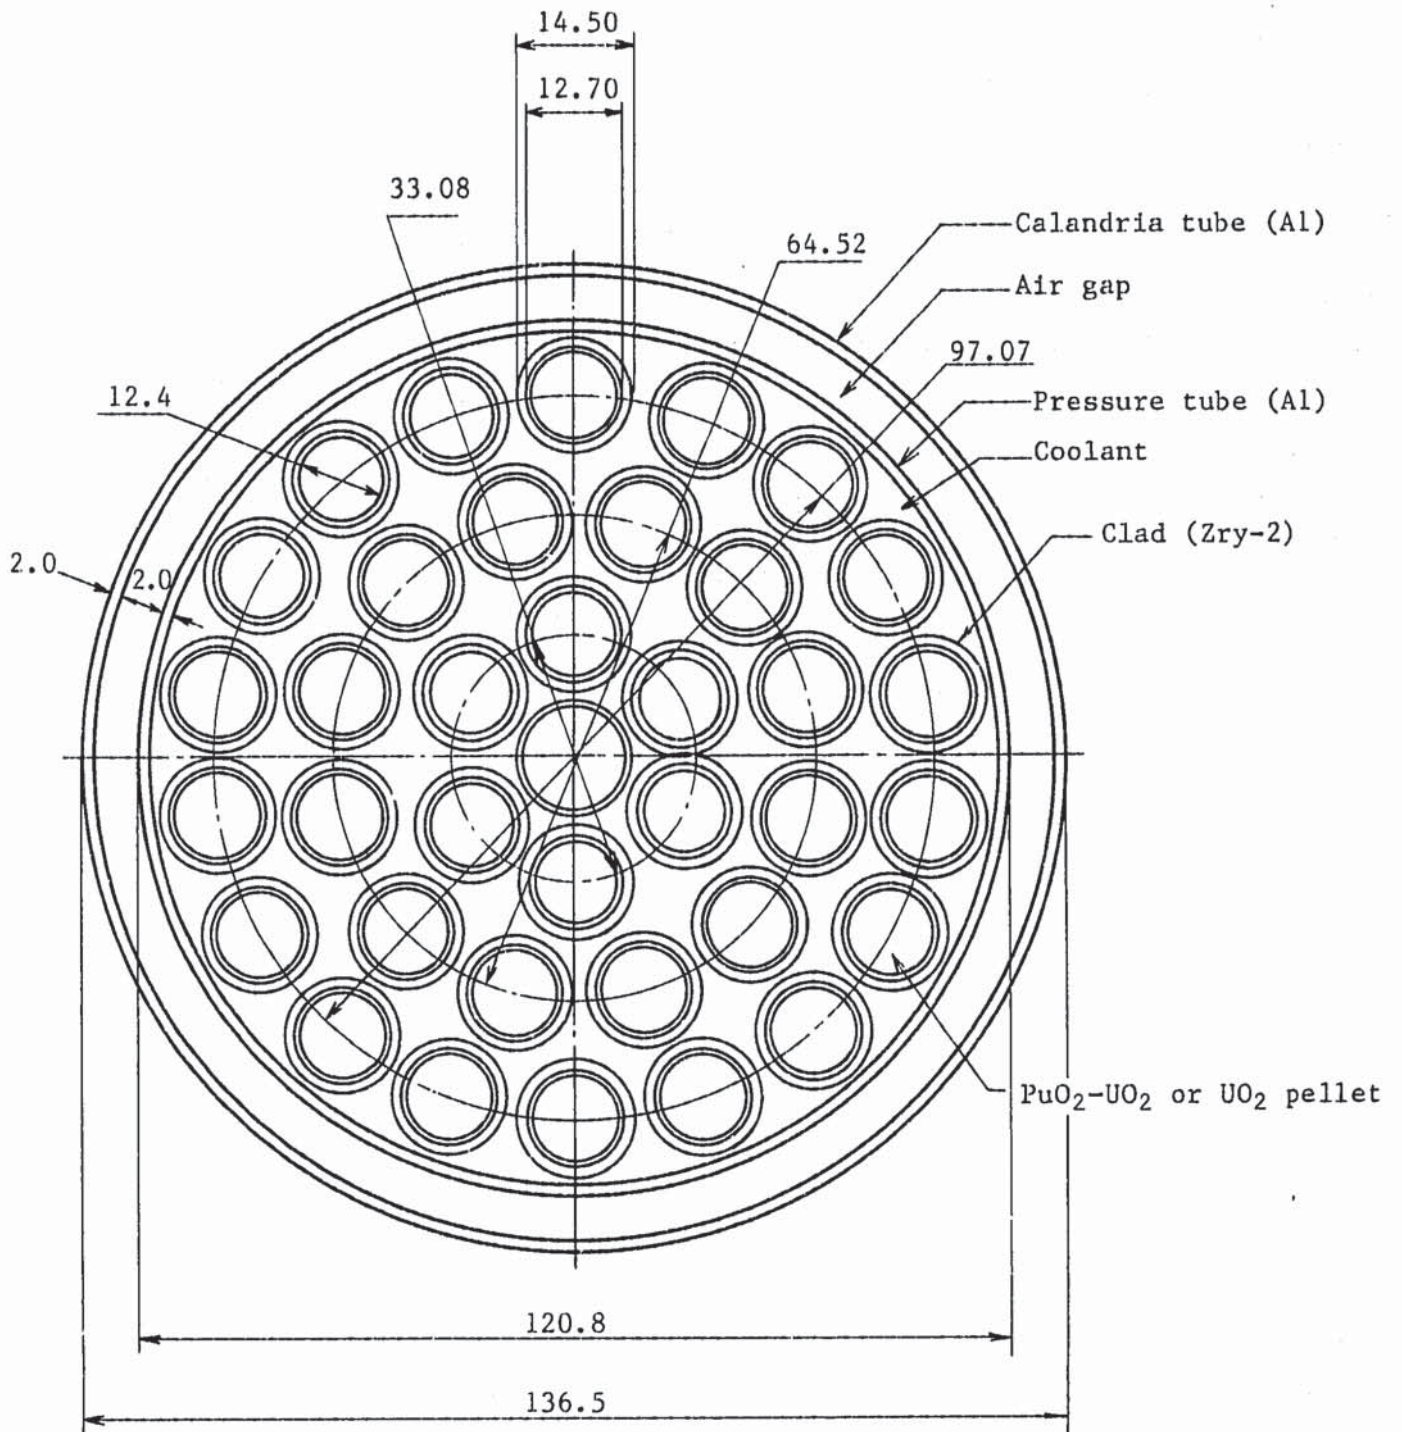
Cross-sectional view of Type I~V 36-rod test cluster.
